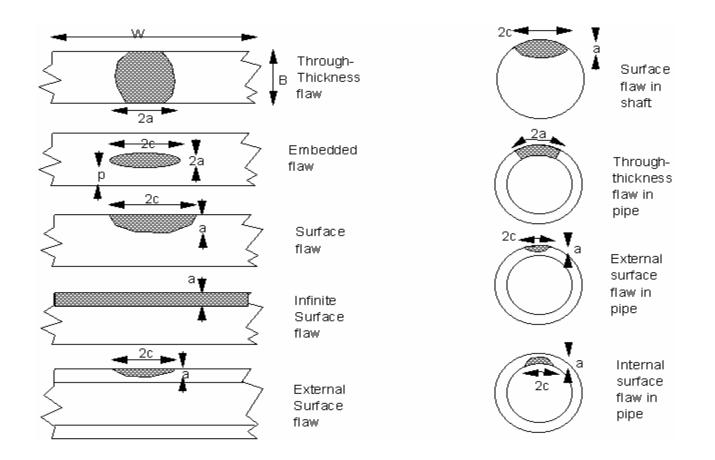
Definition of Flaw Dimensions for Common Component Geometries
